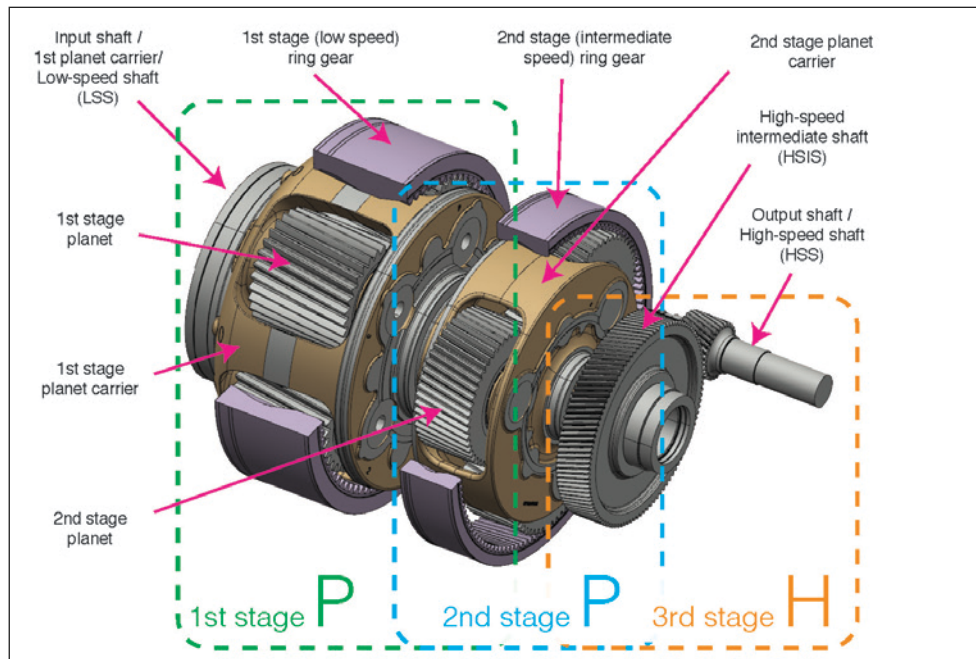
Assembly drawing of shafts and gears from the 3-stage Siemens Gamesa Renewable Energy gearbox (PPH configuration).
